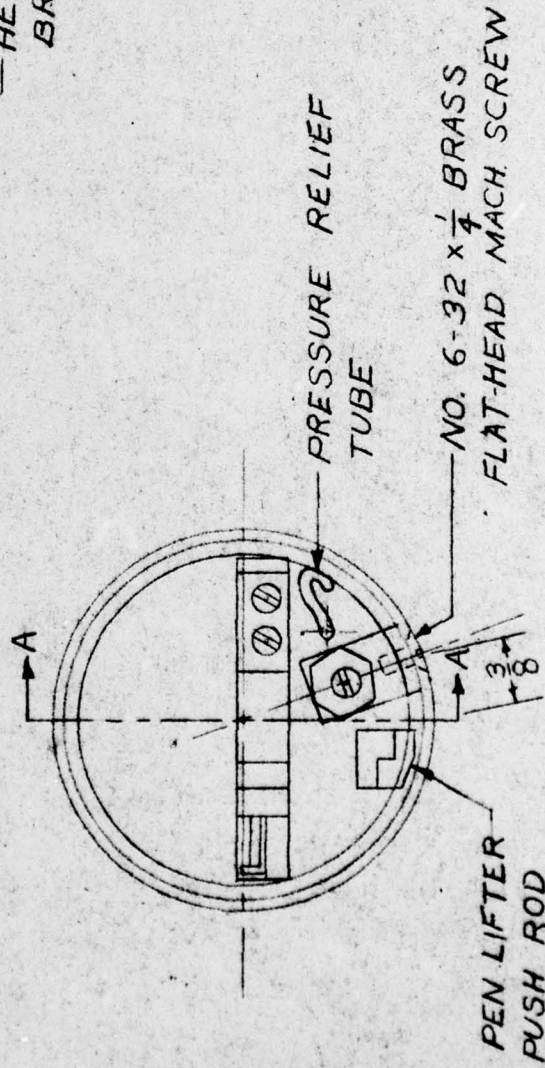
~~ASSEMBLY~~ OC-2B/S BATHYTHERMOGRAPH ASSEMBLY-CROSS SECTION
